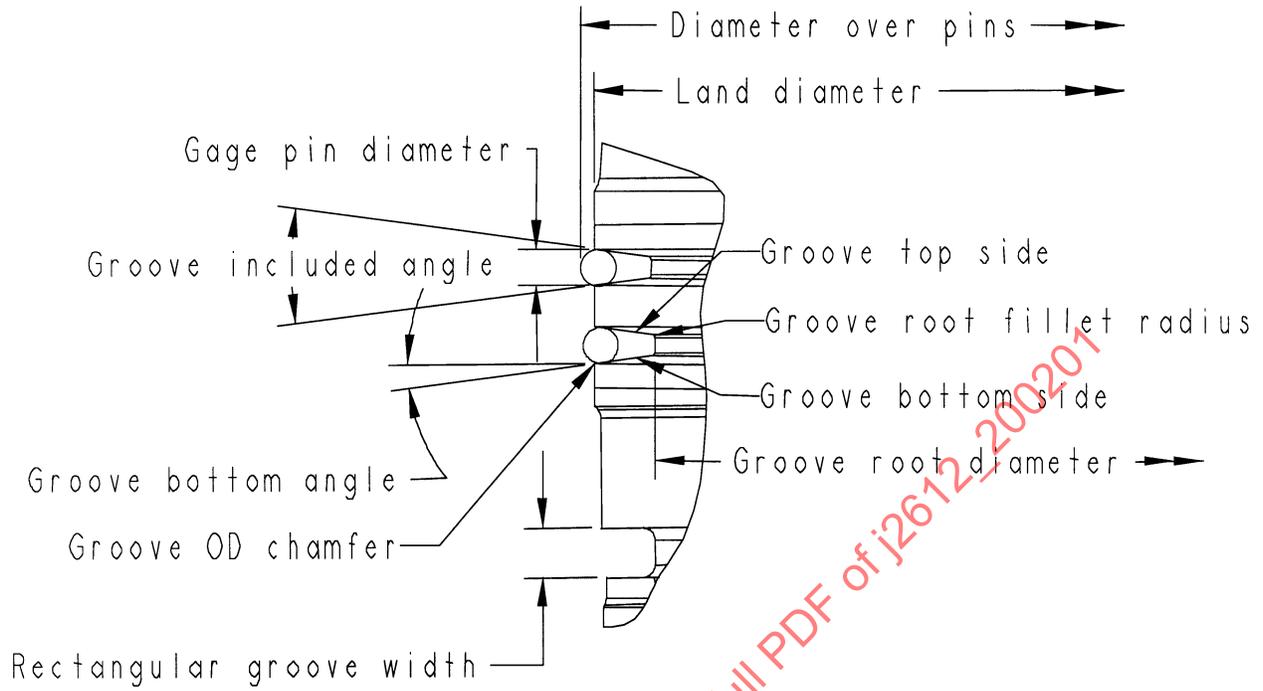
MEDIUM/HEAVY DUTY MONOBLOCK PISTON: RING BELT REGION
